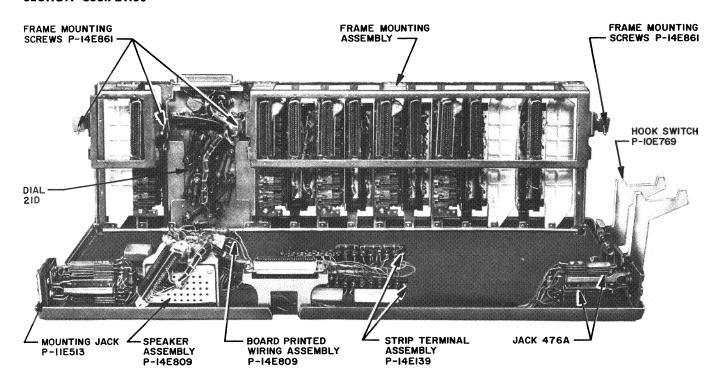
2A-Type Telephone Console, Frame Mounting Assembly Raised
